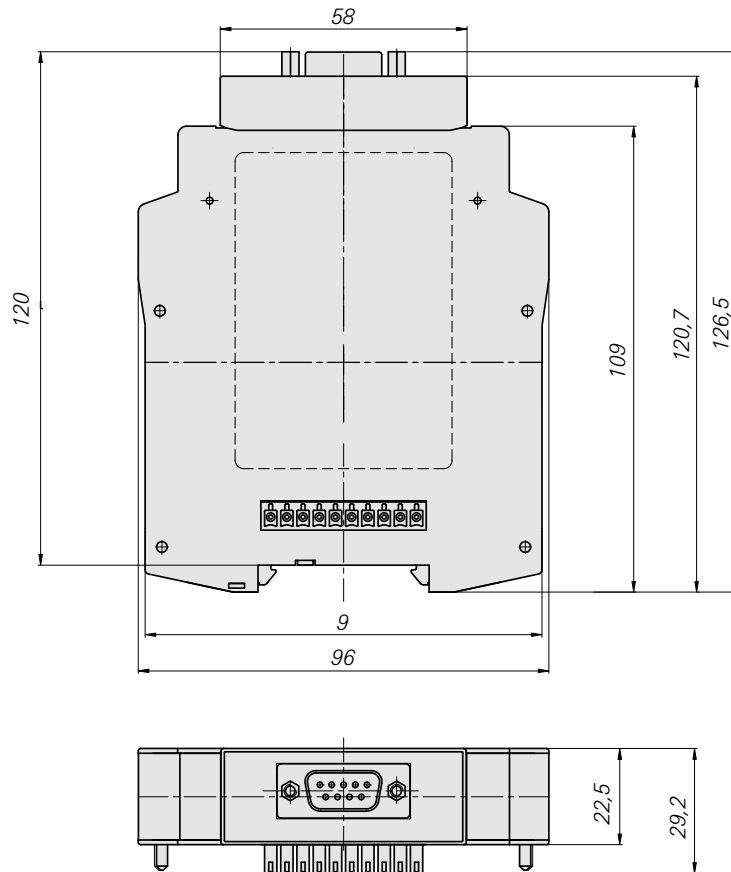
Dimensional drawing SP-PROFIBUS-DP (mm)
